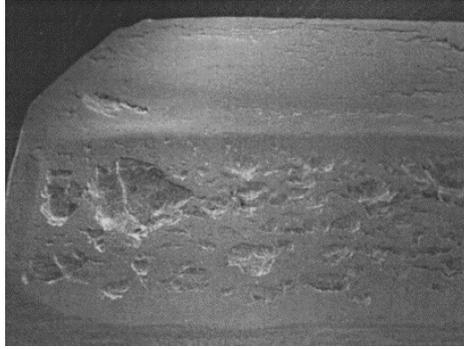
Pitting formation on a gear tooth (*obtained from S. Glodez et al. (2003)*)
